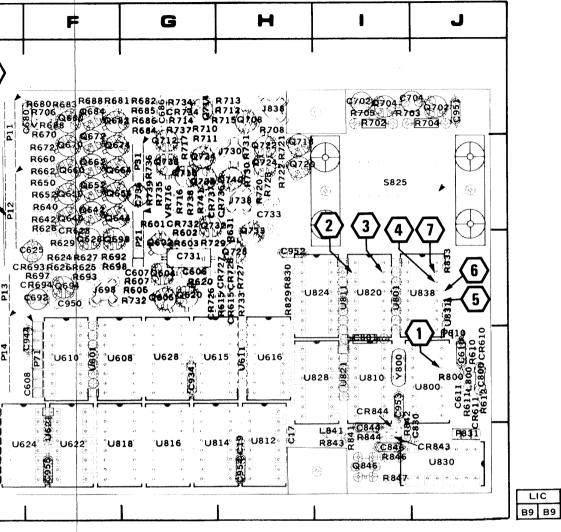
A3—Output circuit board. Component locations as viewed with board installed.
